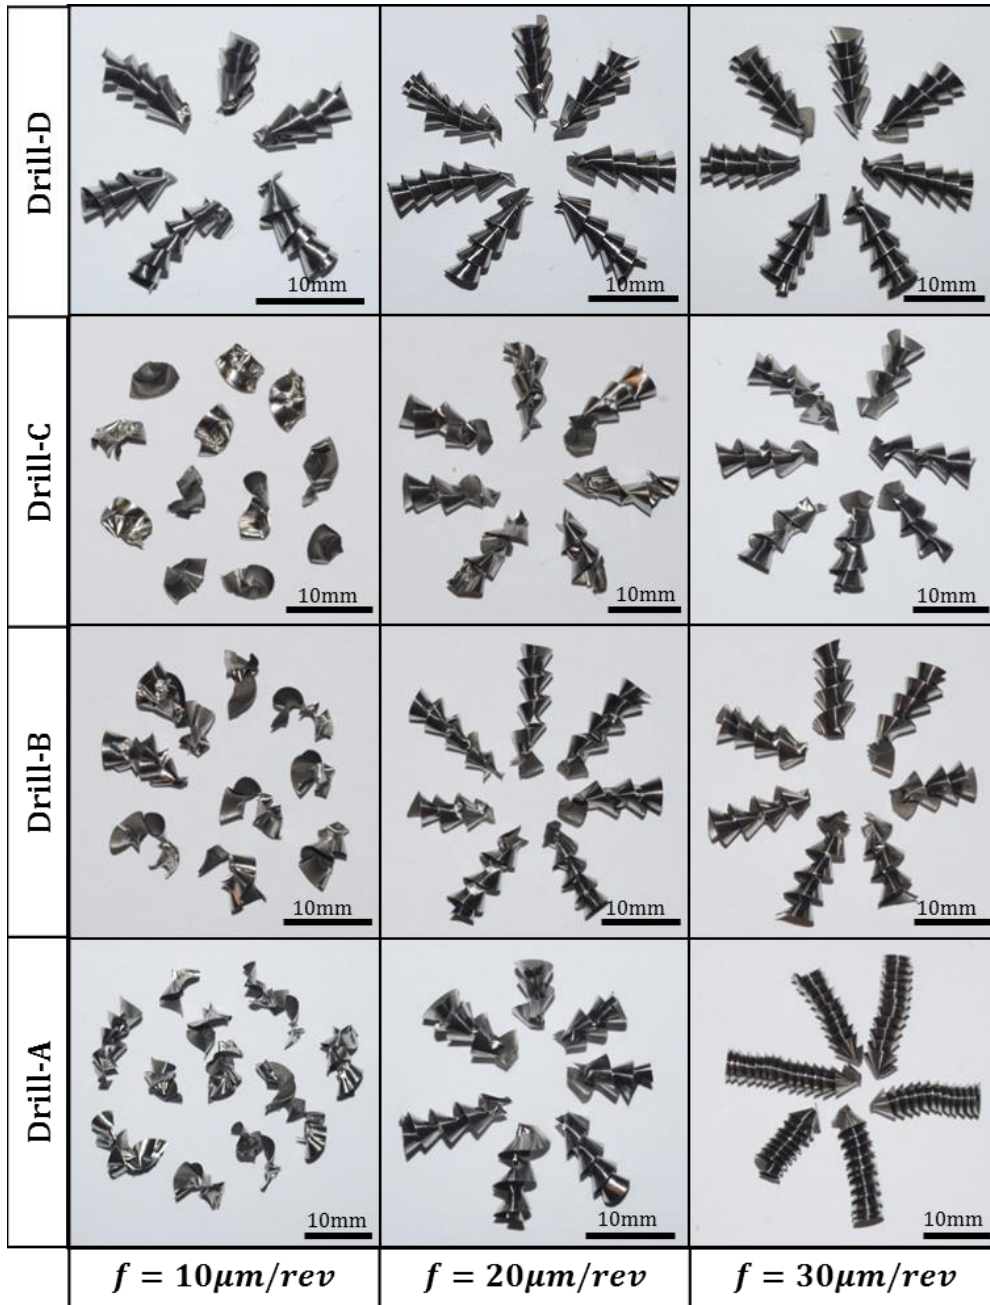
Chip morphologies in single-lip deep hole drilling of Inconel-718
